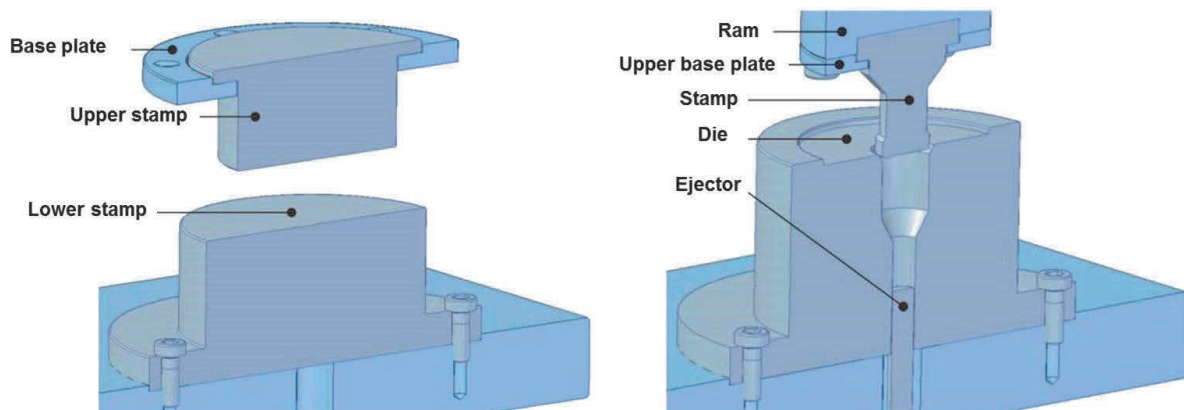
Modular tool system for sinter forging: upsetting (left) and forward extrusion (right)
